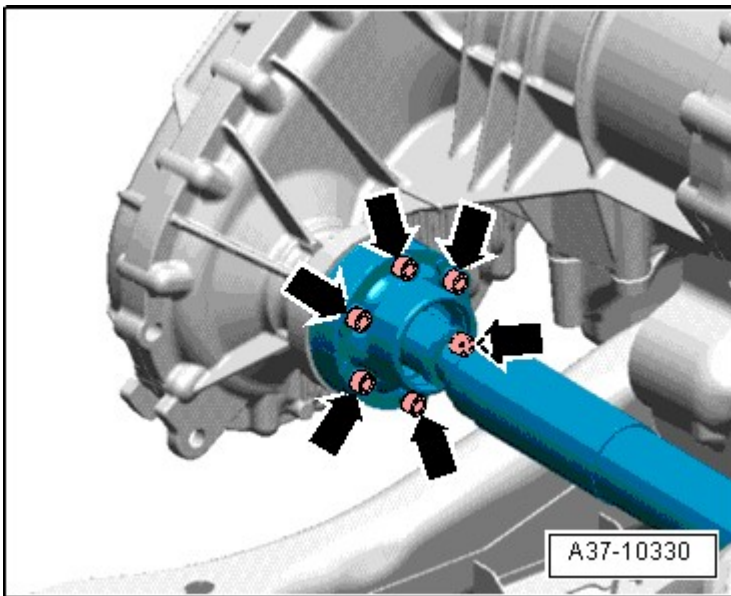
Identifying Driveshaft Bolts -Arrows-
